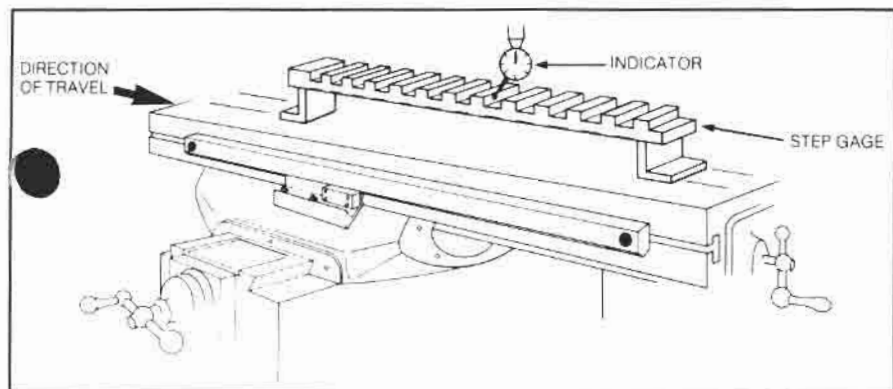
Example of Measurement Set-up Using Step Gage as a Standard
